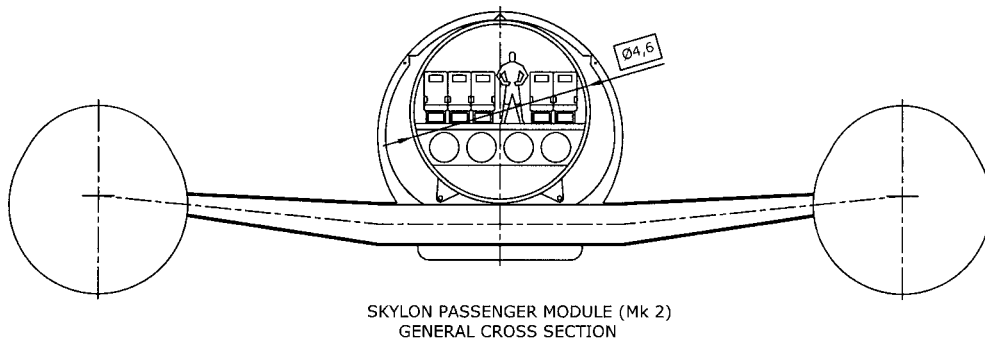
Cross-section view of payload bay with Cabin Module installed.
